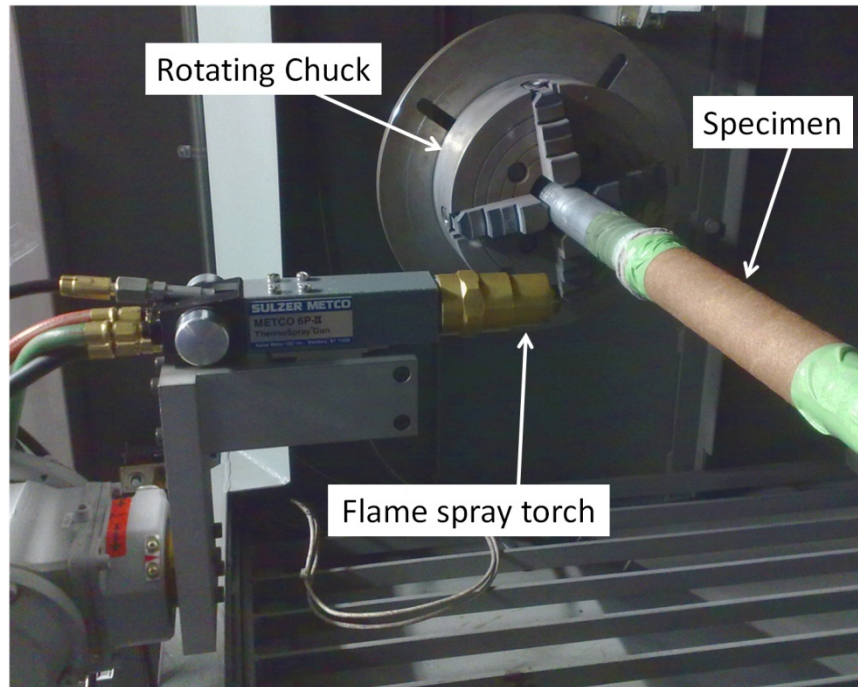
Experimental assembly for flame-sprayed Al-12Si coating deposition
